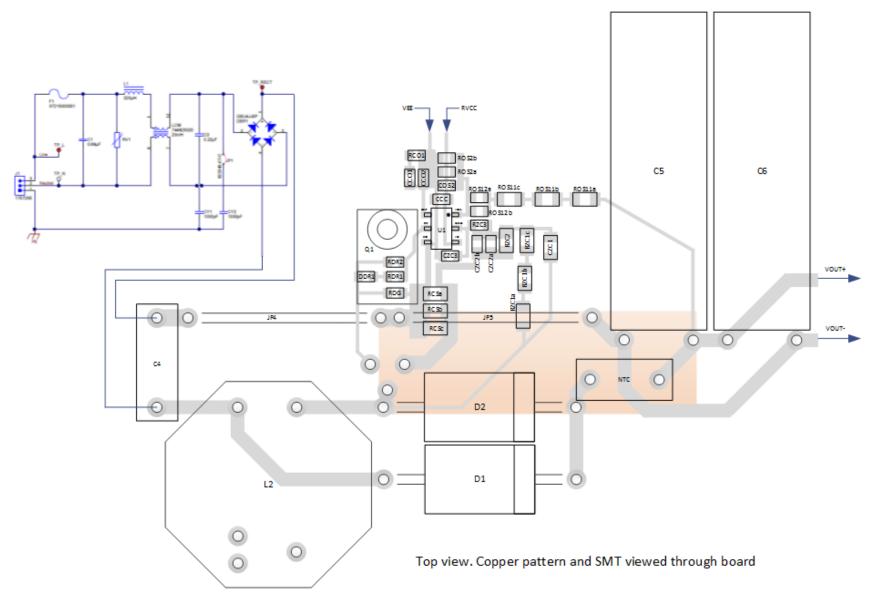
Recommended PCB Layout (Single-Sided Assembly)
